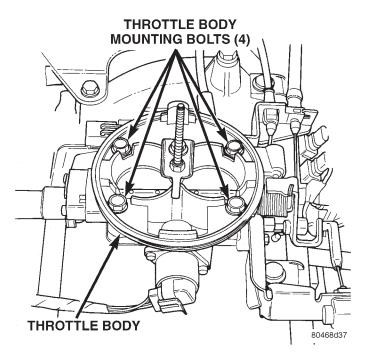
Throttle Body Mounting Bolts—5.2L/5.9L Engines—Typical
